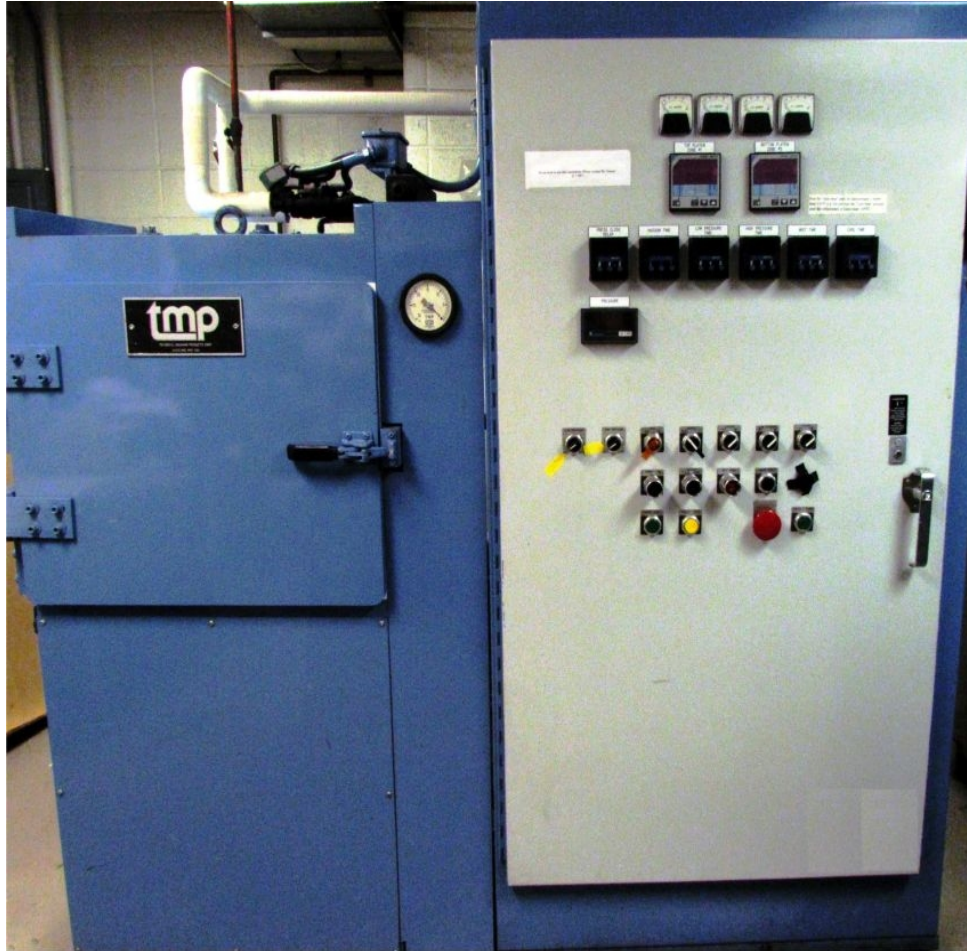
Autoclave vacuum press machine used for curing the laminates
